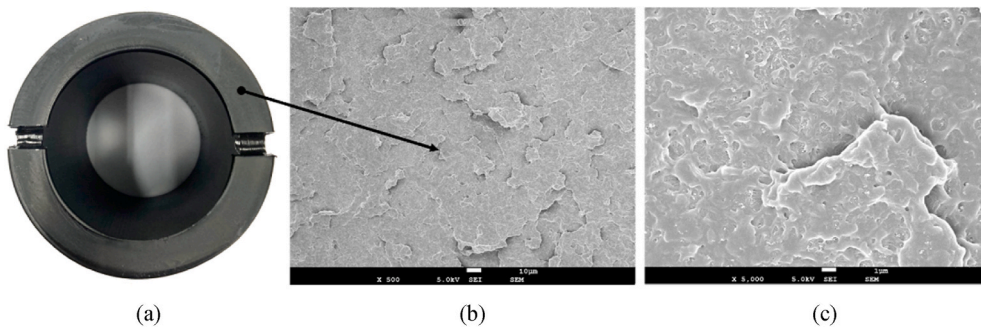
Fracture surface of CF specimen after AT test. (a) Pipe cross-section, (b) $\times 500$ and (c) $\times 5000$.
